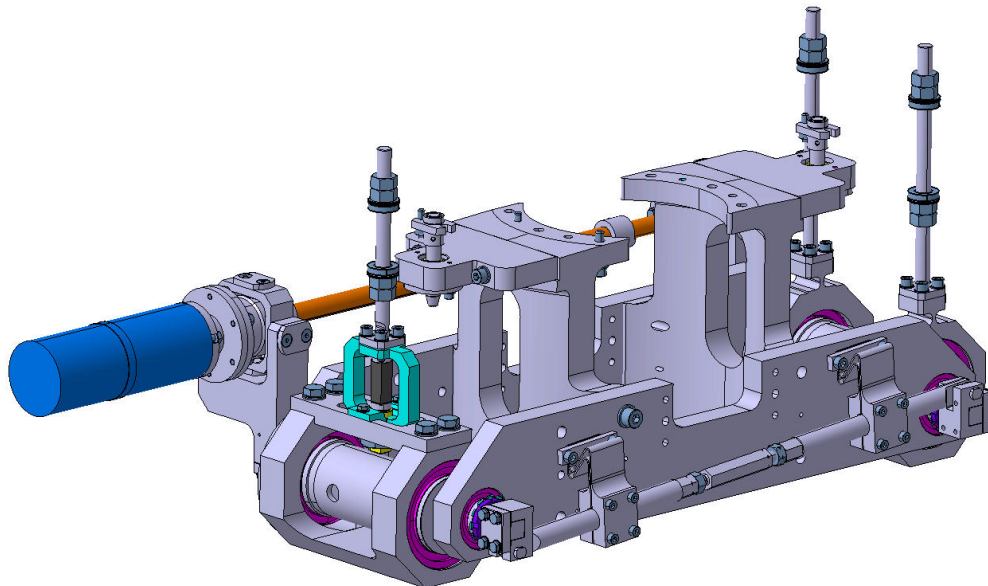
SPL tuner design by CEA Saclay based on eccentric cam with rollerbearing.
